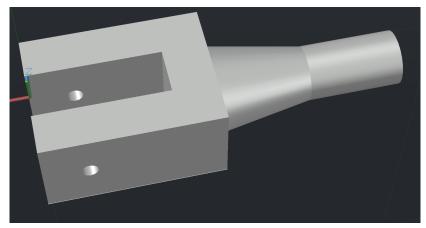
3D Design of the Prototype 2 of the Knob Mechanism
